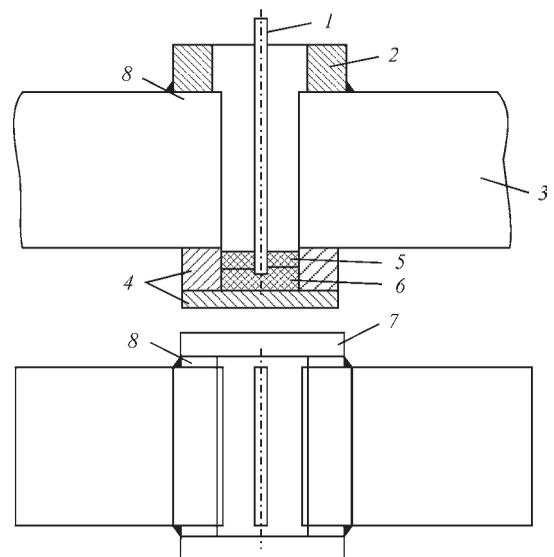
ESW scheme: 1 — plate electrode; 2 — run-off tabs; 3 — welded joint; 4 — metallic pocket; 5 — working flux; 6 — exothermal mixture; 7 — forming backgigs; 8 — side plates
